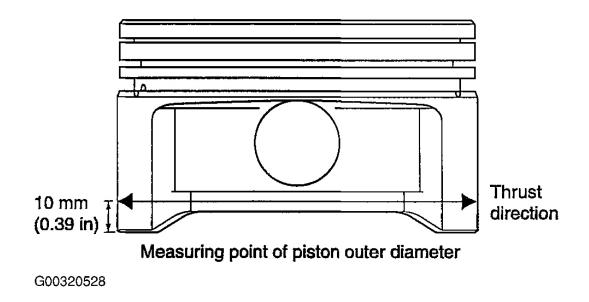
Measuring Piston Diameter Courtesy of KIA MOTORS AMERICA, INC.
